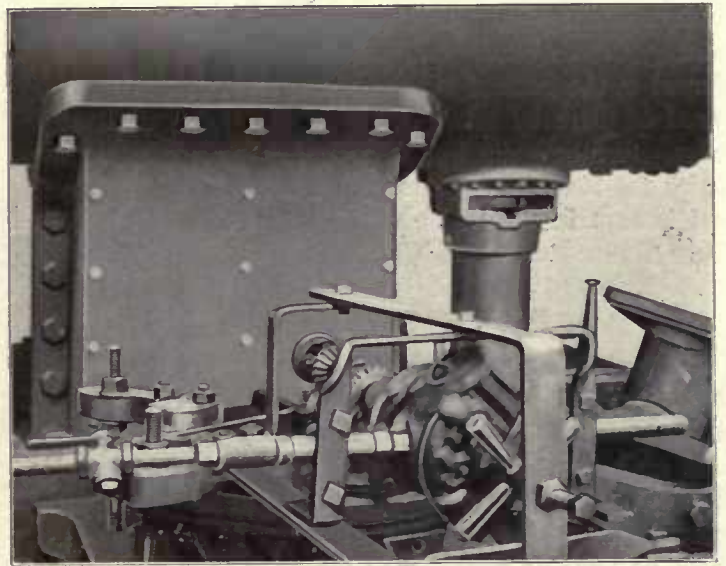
Air Motor Holder for Valve-Facing Machine.
